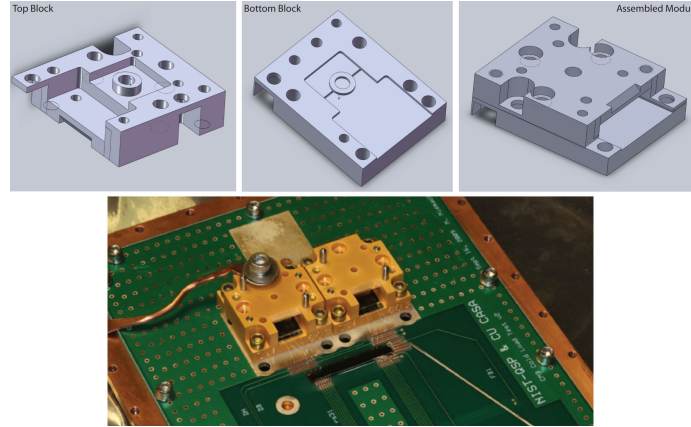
The split-block brass module on which the detectors are mounted. *top*: Schematics showing the top and bottom parts of the module. *bottom*: A photo of 2 single pixels mounted on two such modules on a PCB.
